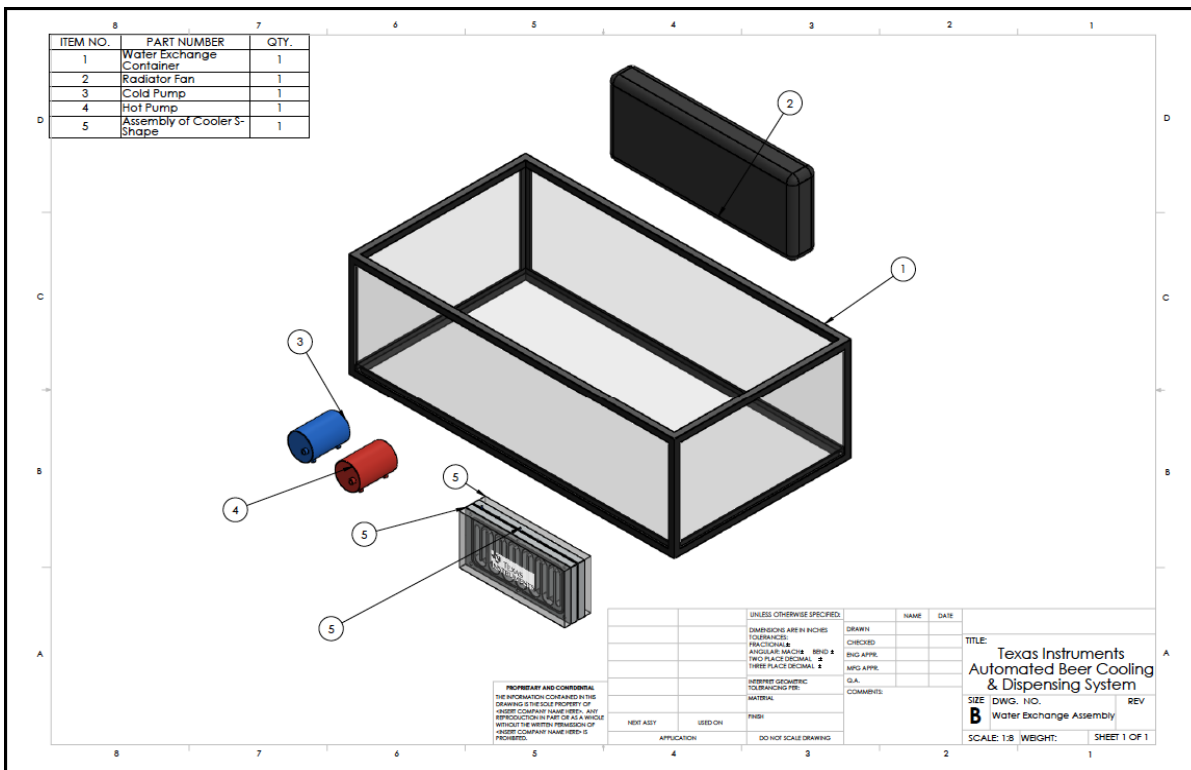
SolidWorks Drawing of Water Exchange Assembly
